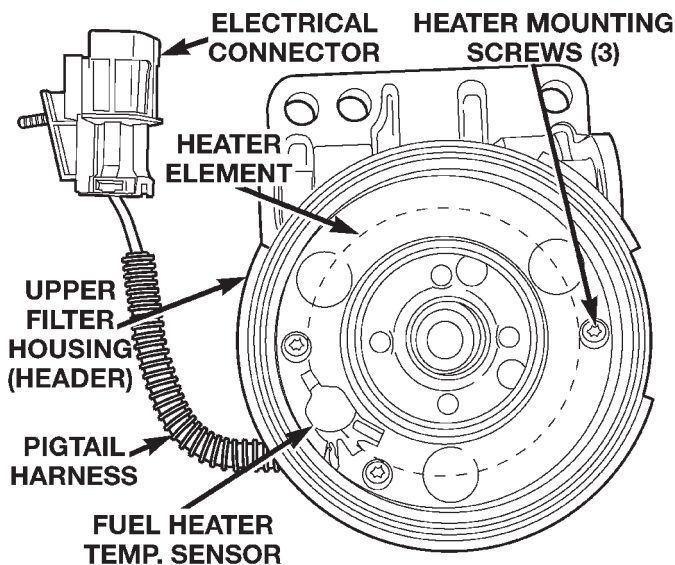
Fuel Heater Mounting Screws (Bottom View)
